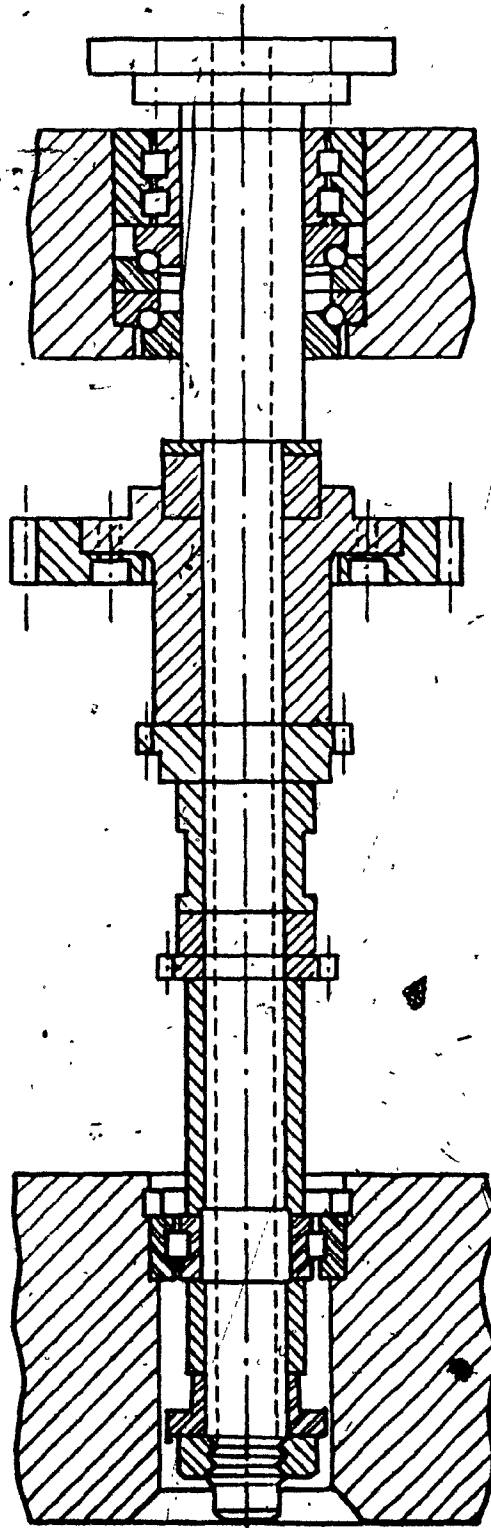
A CROSS-SECTION OF THE MACHINE TOOL SPINDLE
